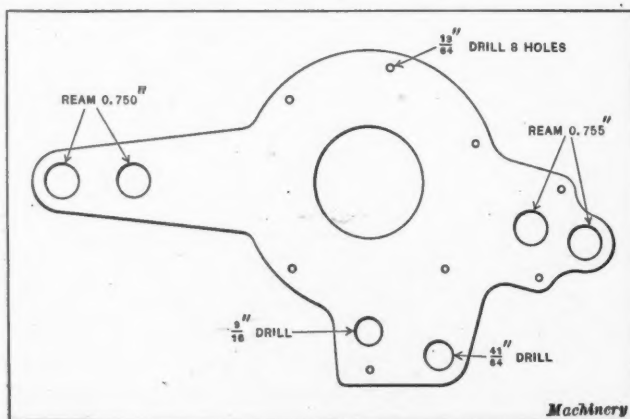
Motor Car Brake Spider which is drilled and reamed on the Machine shown in Fig. 10
